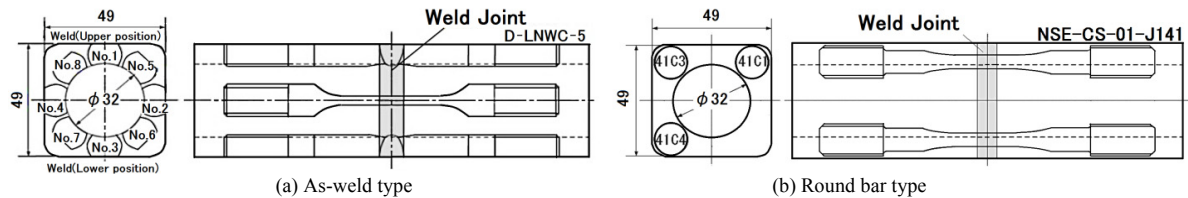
Location of fatigue specimens removed from the JK2LB weld joint.
